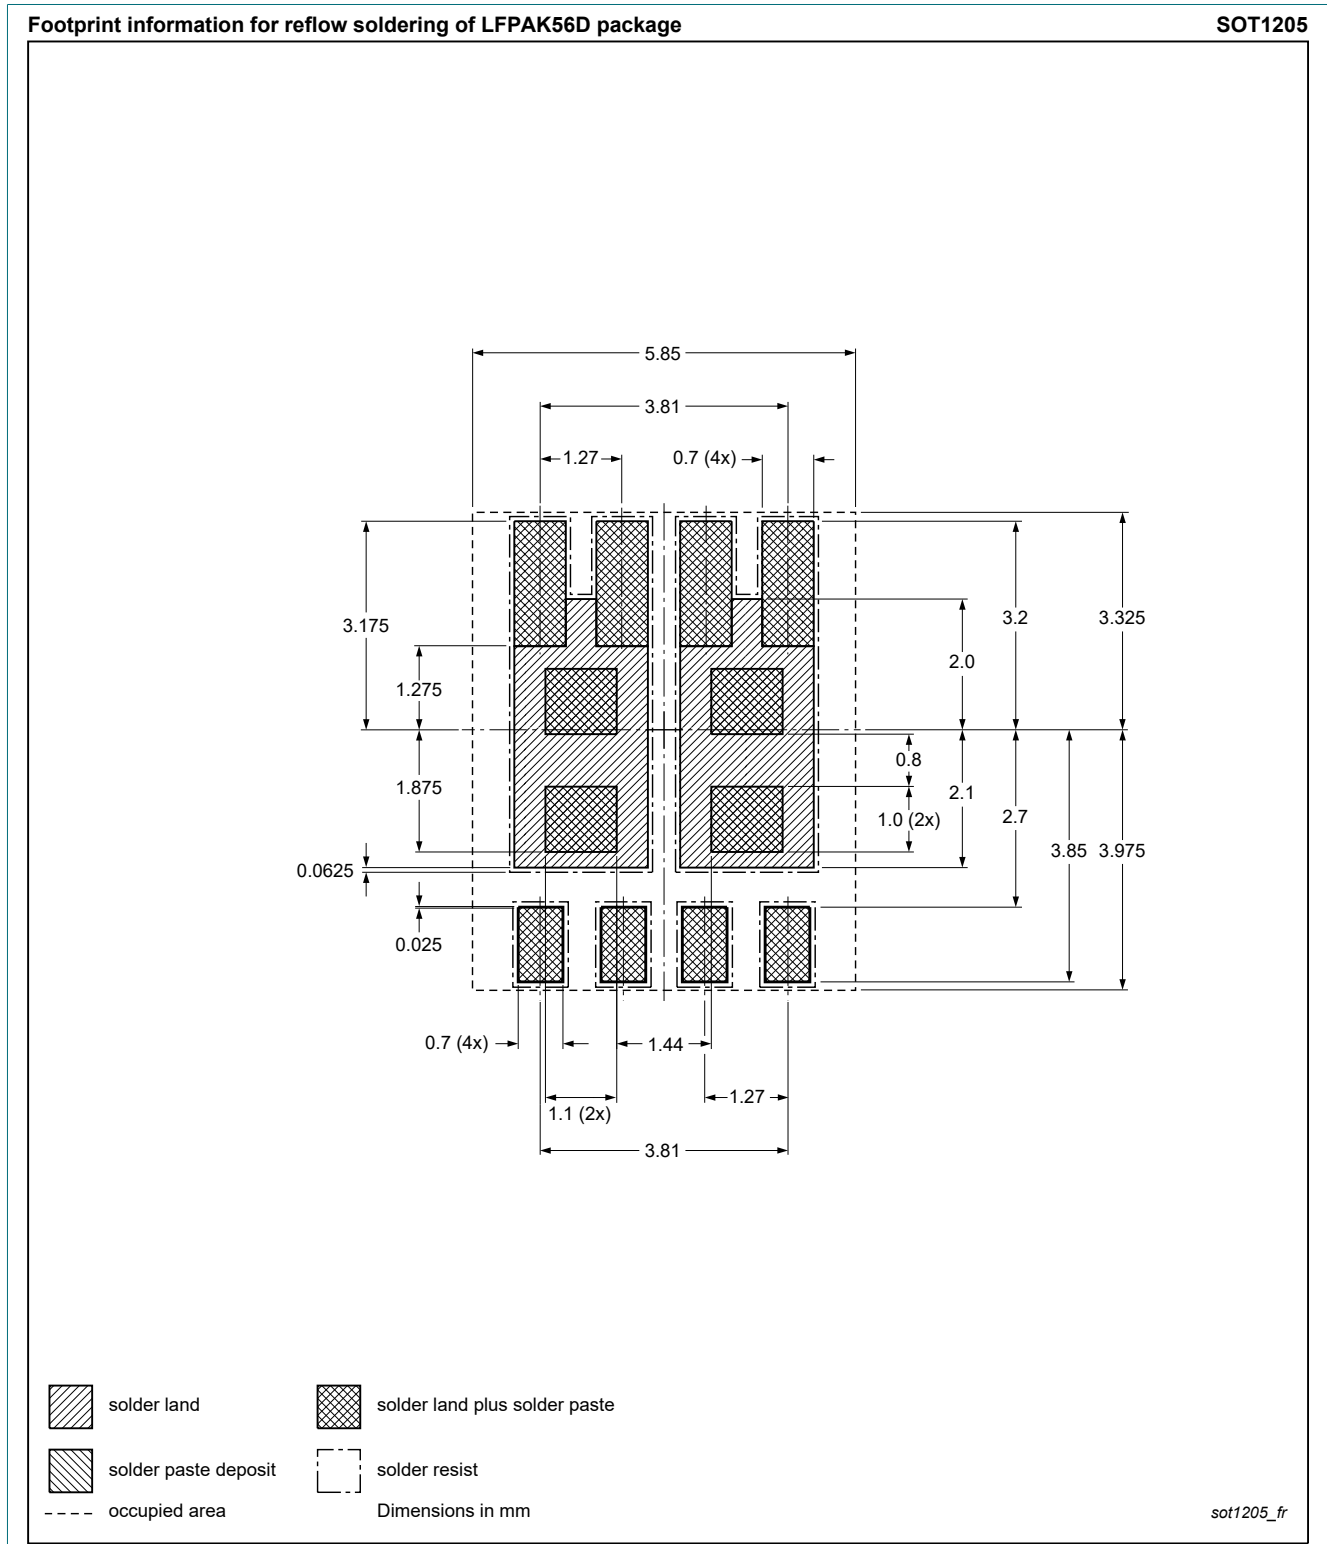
Reflow soldering footprint for LFPAK56D; Dual LFPAK (SOT1205)
